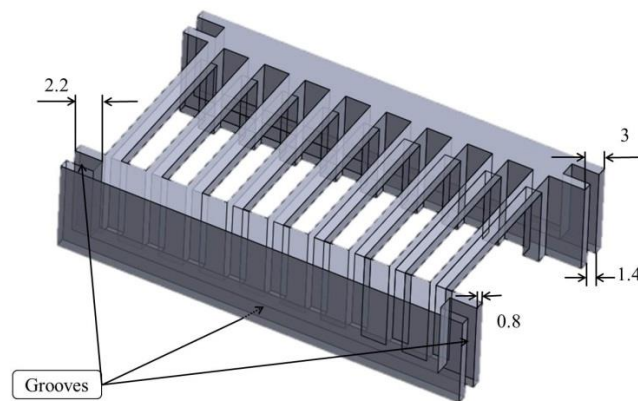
A Modified Piece of Mold V3b Integrated all Small Pieces in Mold V3a
